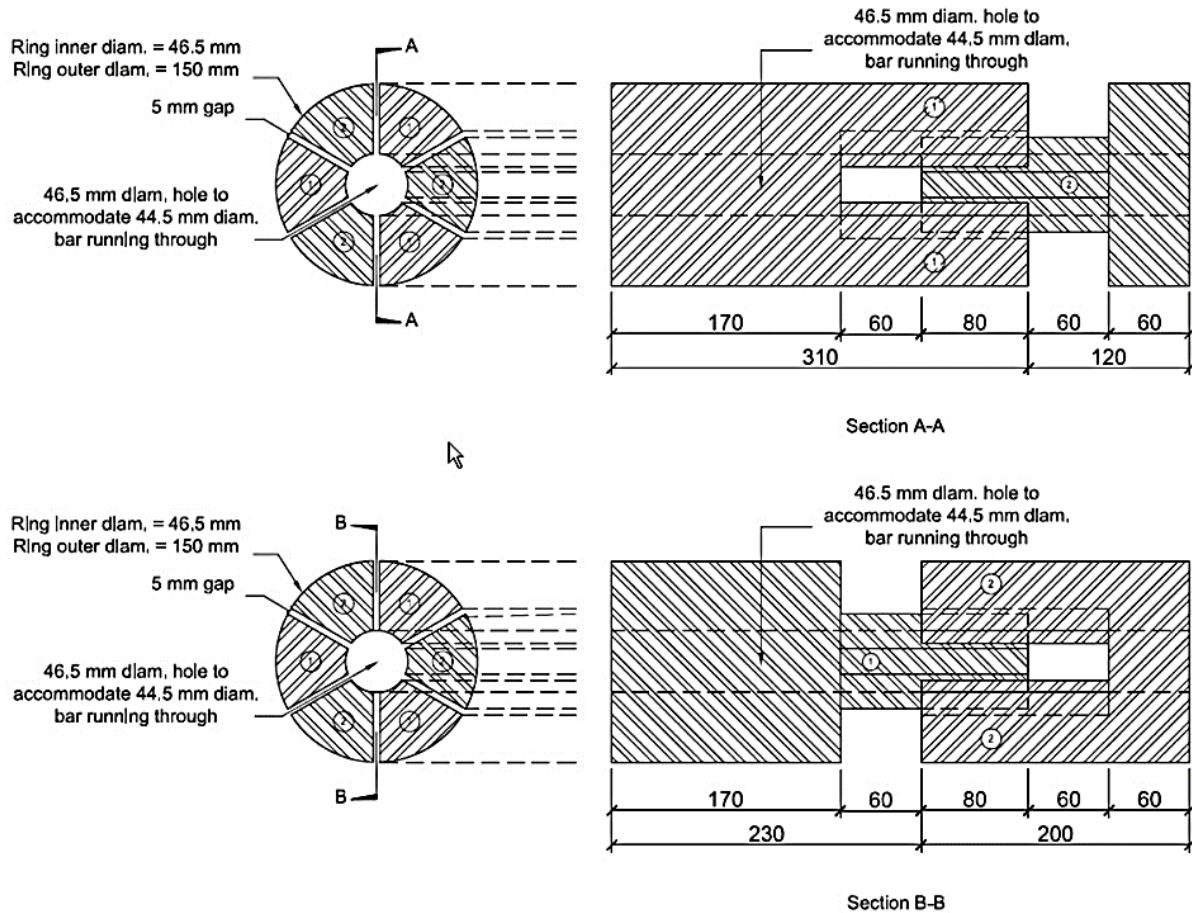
Cross sections of steel core restraining end elements (Al-Sadoon, 2016)
